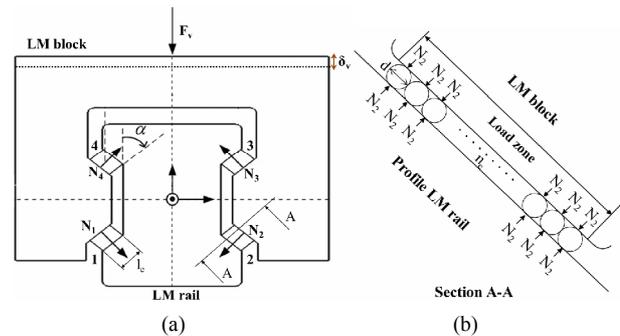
Contact force of the roller linear motion guide and Sec. AA along the perpendicular direction.
